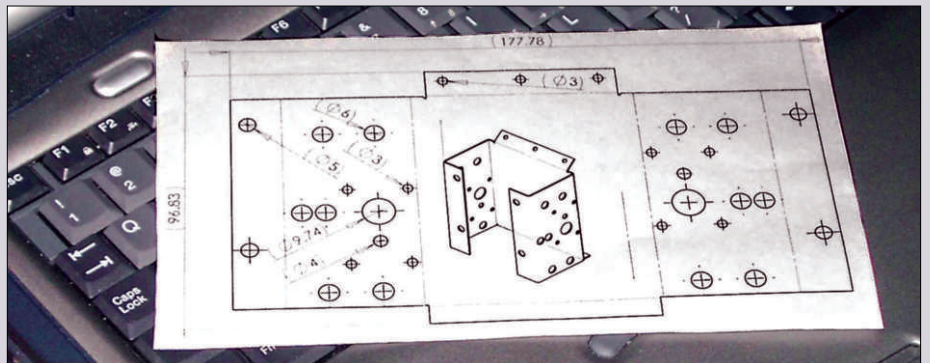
Paper layout hot off the press. Printed 1:1, the layout is ready to use.
